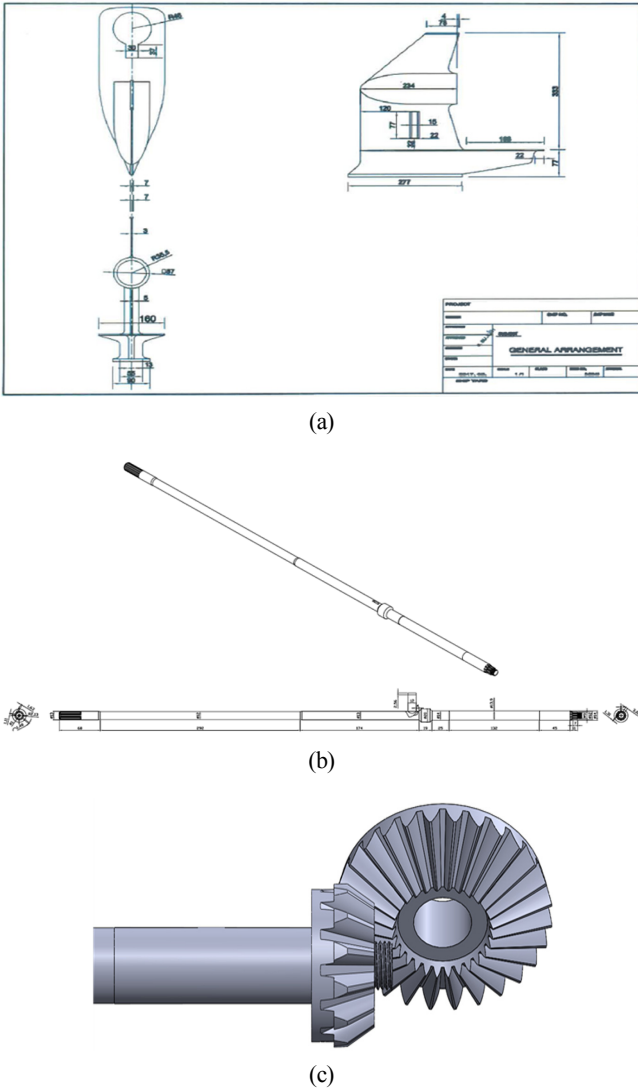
(a) entire drawing for the outboard motor, (b) drawing for drive shaft, (c) schematic diagram between drive pinion and bevel reduction gear
